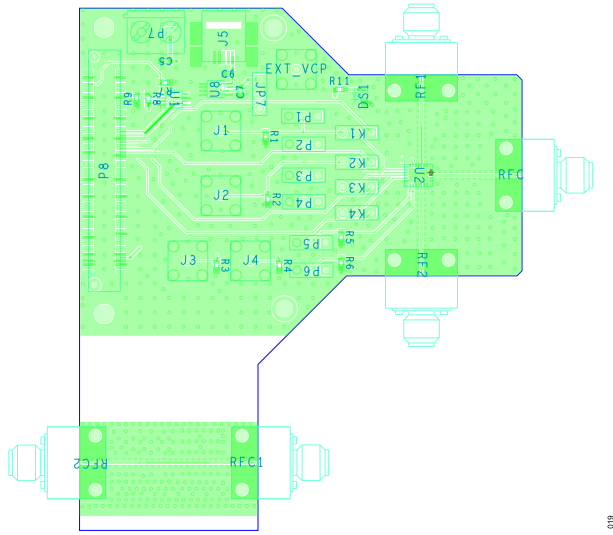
EVAL-ADGM1001SDZ Component Side PCB Drawing (Layer 1)
